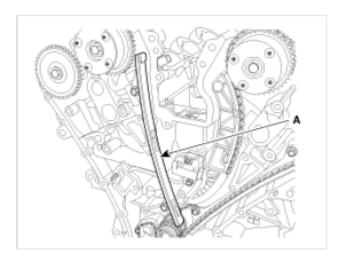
Compressing Rod Courtesy of HYUNDAI MOTOR CO.
